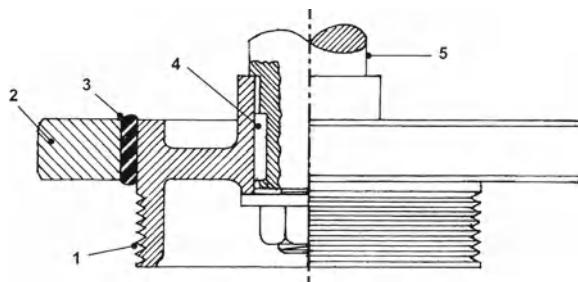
Torsional vibration damper located at the front-end of the crankshaft
